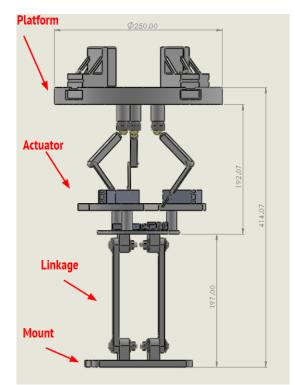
The engineering drawing of the build design with dimensions (m).
